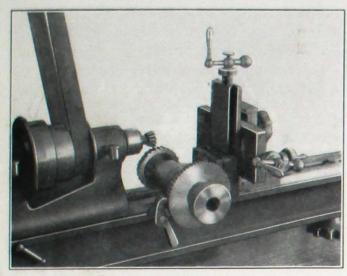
Head end view of Milling Attachment set to mill teeth in a Milling Cutter.
